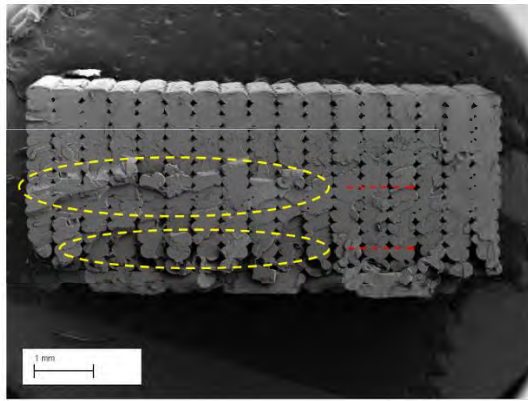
The fracture surface of 3D printed PLA printed in two orientations (x and y axis)
